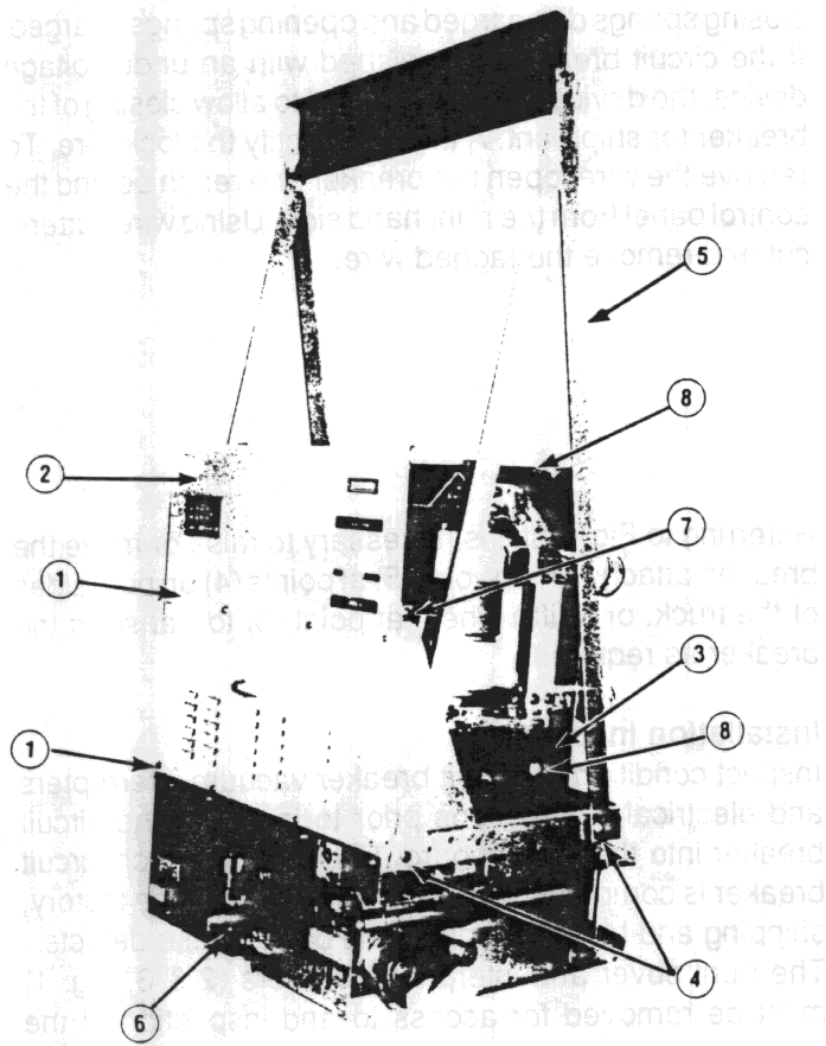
Circuit Breaker Assembly with Lifting Yoke Installed
